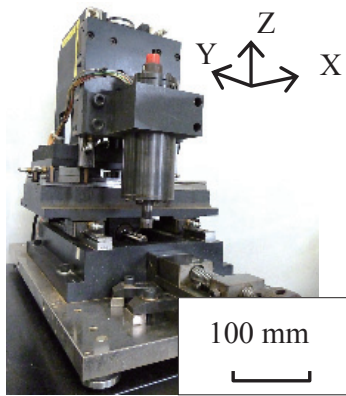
Desktop-sized CNC machine tool, MM 55.
